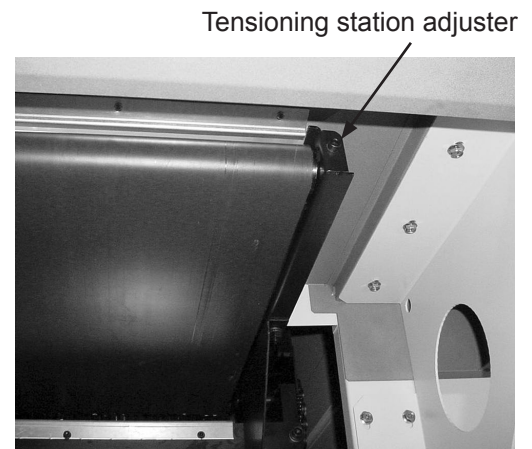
Underside View of Feed Table and Infeed Conveyor
